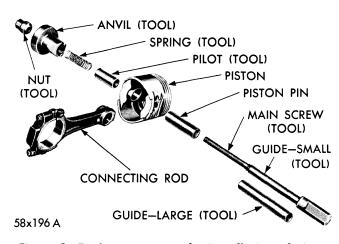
Tool arrangement for installation of piston pin—361 cu. in. engine
